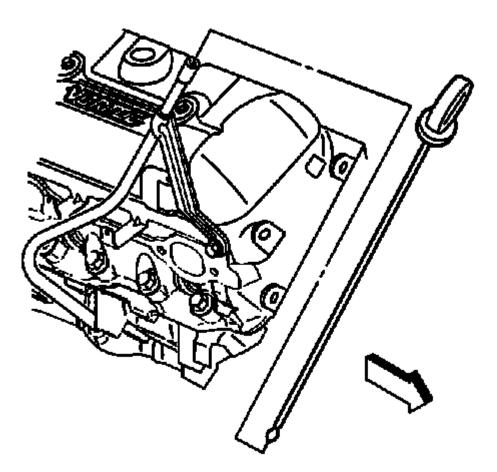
Locating Oil Level Indicator Courtesy of GENERAL MOTORS CORP.
